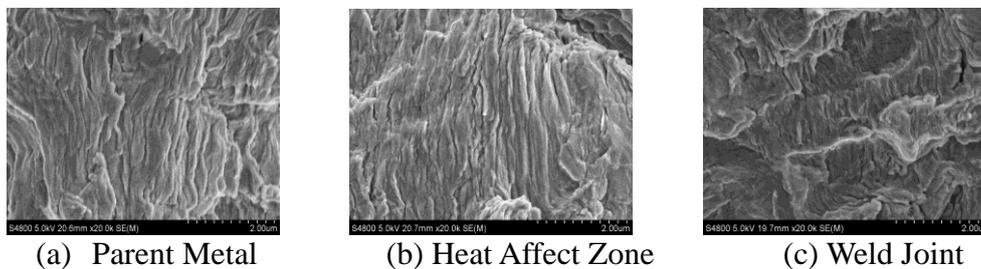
The Microstructure of Fatigue Crack Extension Fracture on Different Parts of Welding Joint
